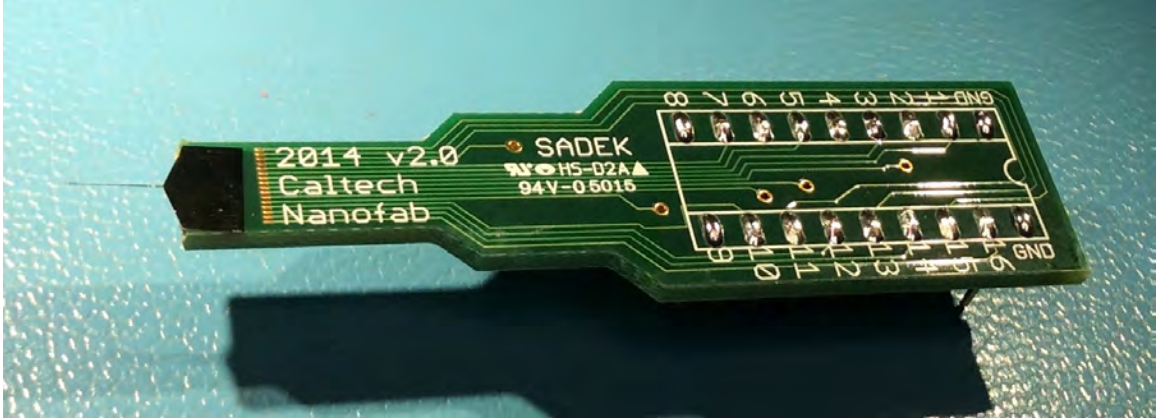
Assembled 16-channel probe. Shown is the assembled neural probe prior to wirebonding and epoxy encapsulation.
